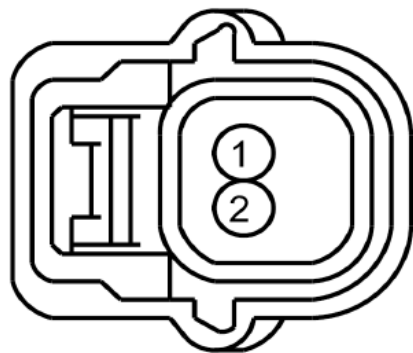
Left 1 Side Air Curtain Sensor Connector End View (C3057)
